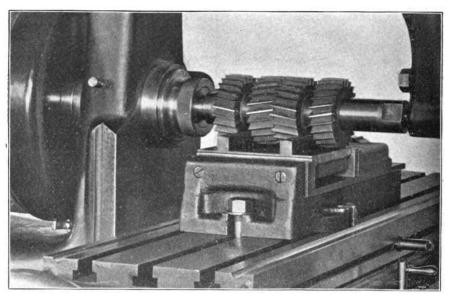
FINISHING A VISE-BLOCK WITH A GANG OF CUTTERS.
